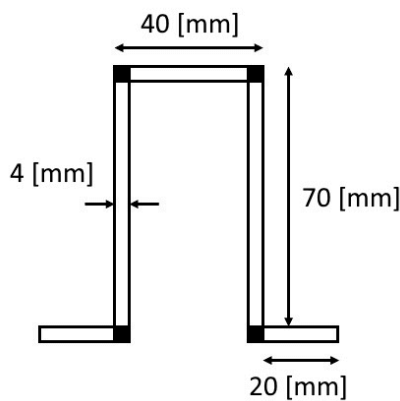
Hat stringer for wing box upper and lower skin panels. Area equals 880 [mm²].
